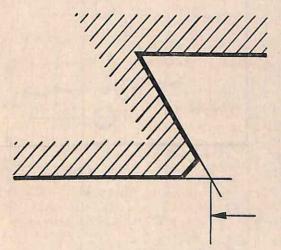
Construction lines extended for dimensioning (IS: 696-1960)
